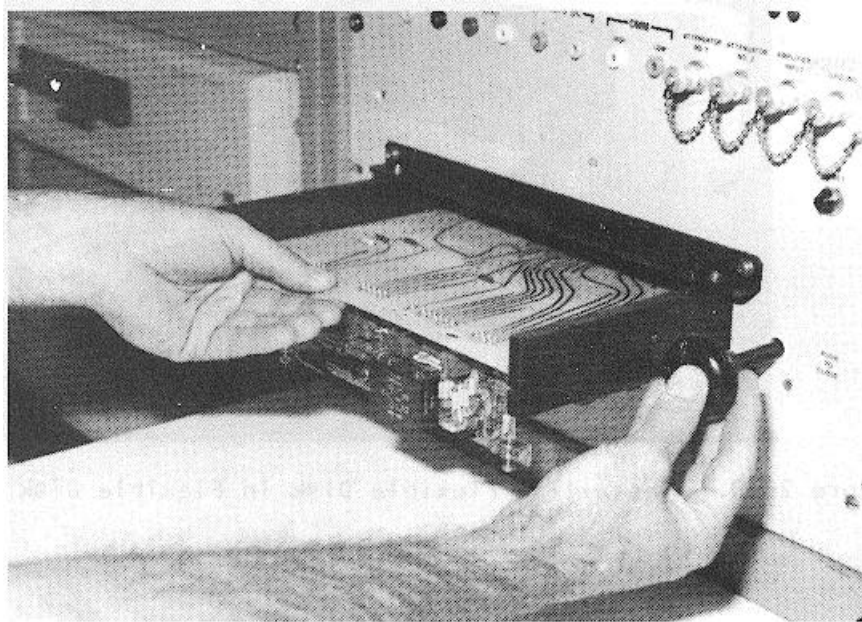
Installing IAB/PCB Assembly in ZIF Connector
